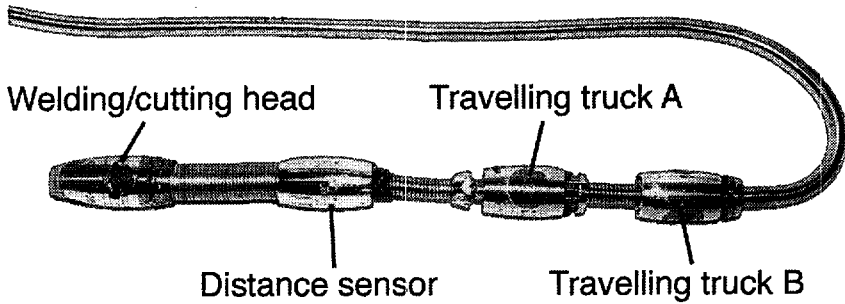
YAG laser welder/cutter for blanket branch pipes.
